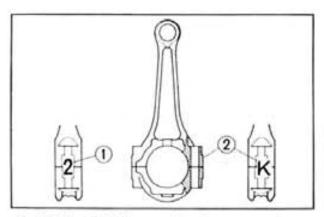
① Tolerance identification mark (Metal fit mark) ② Weight identification mark
